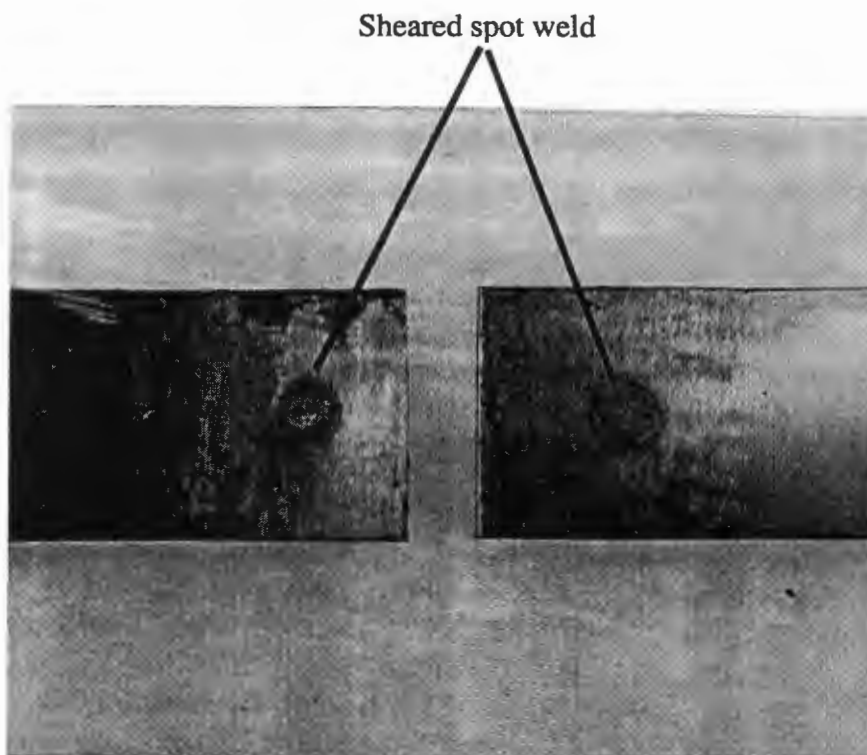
A typical spot weld shear failure; magnified 1 $\times$ .
